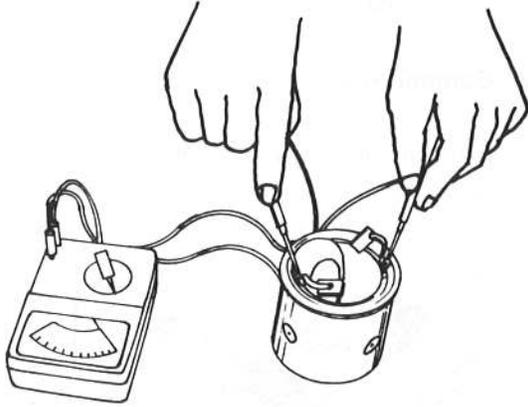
Checking Field Coils for Open Circuit Defects
